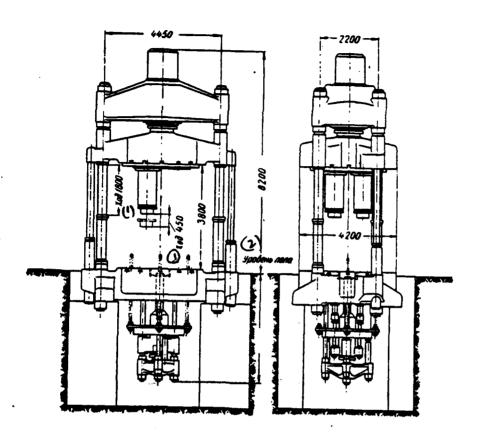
Corner post-type press by effort/force 1200 t for the hot die forging of thick sheets with the auxiliary cylinders for flanging of necks.
